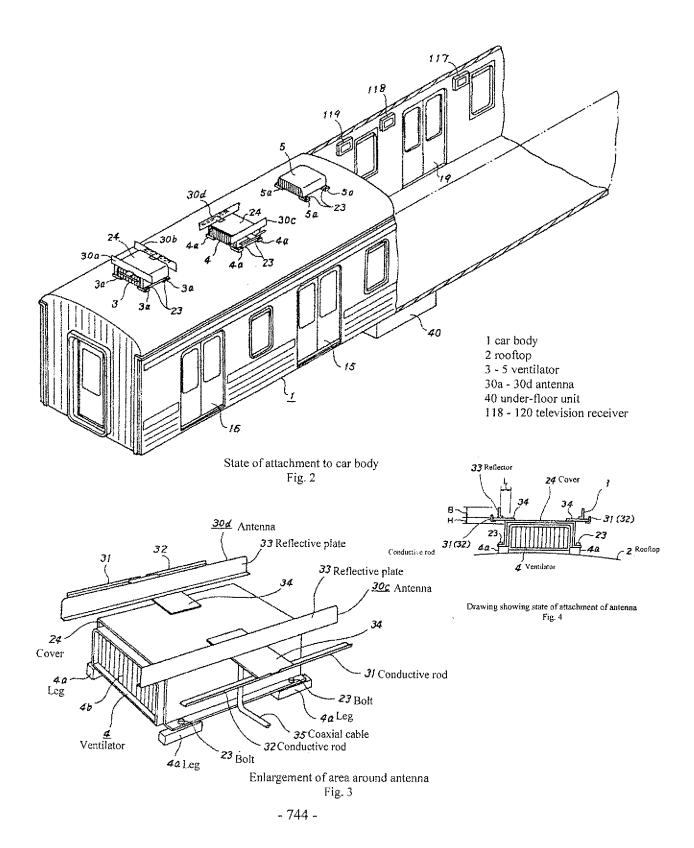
is a block diagram showing an embodiment of the present invention. Fig. 2 is a partial cutaway perspective view showing the state of the system of an embodiment installed in a car body. Fig. 3 is a perspective view showing the important parts of an embodiment. Fig. 4 is a side view showing the important parts of an embodiment. Fig. 5 is an explanatory diagram showing the state of use of the memory of an embodiment. Fig. 6 is a flow chart to
